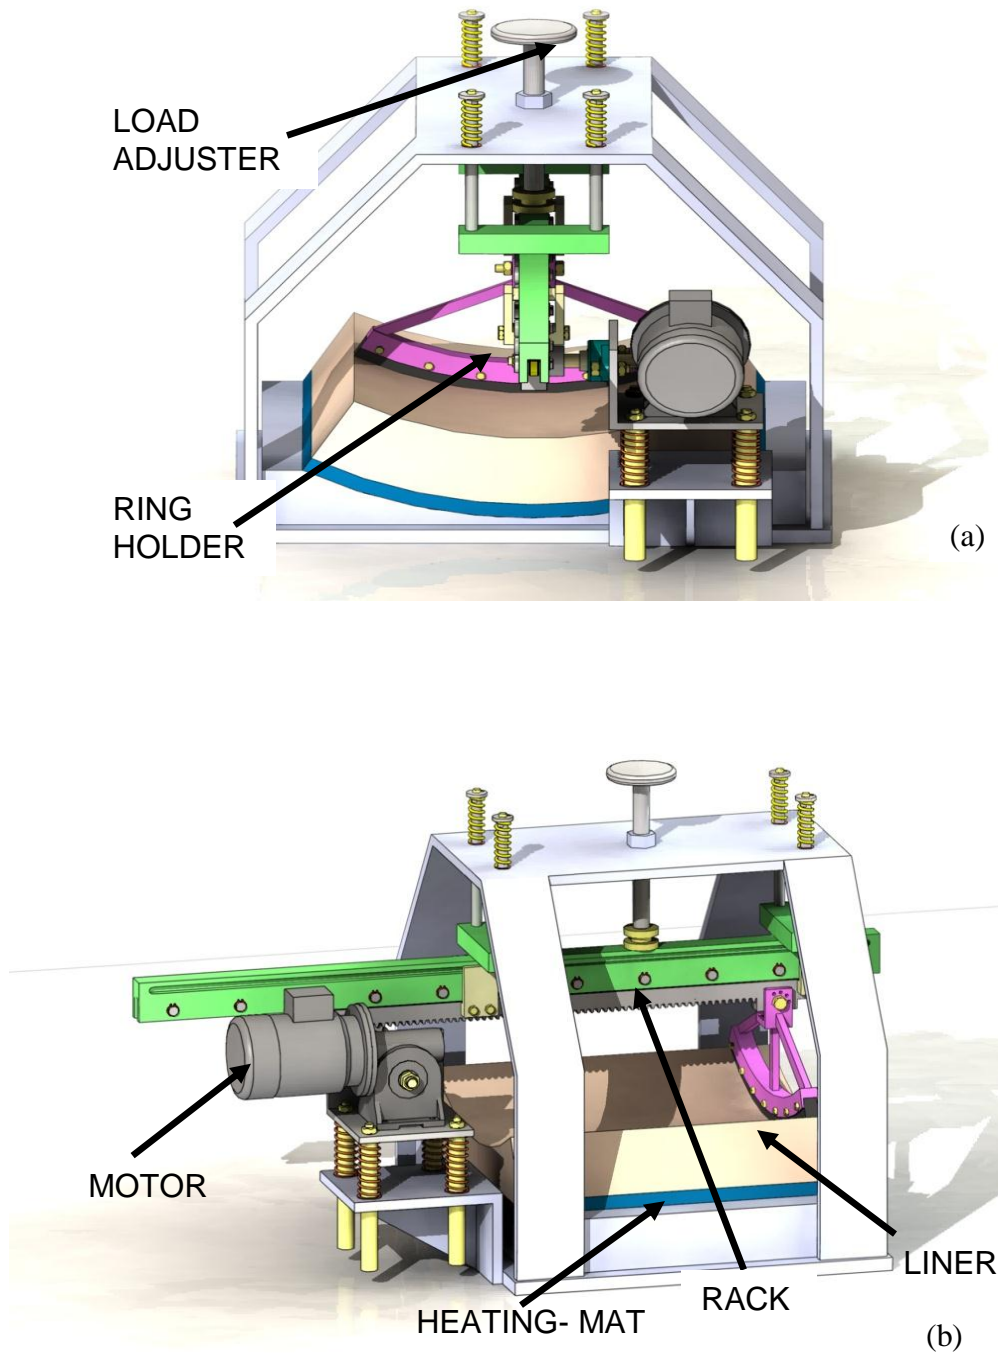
Test Jig for eddy current sensor analysis (a) front view (b) side view
